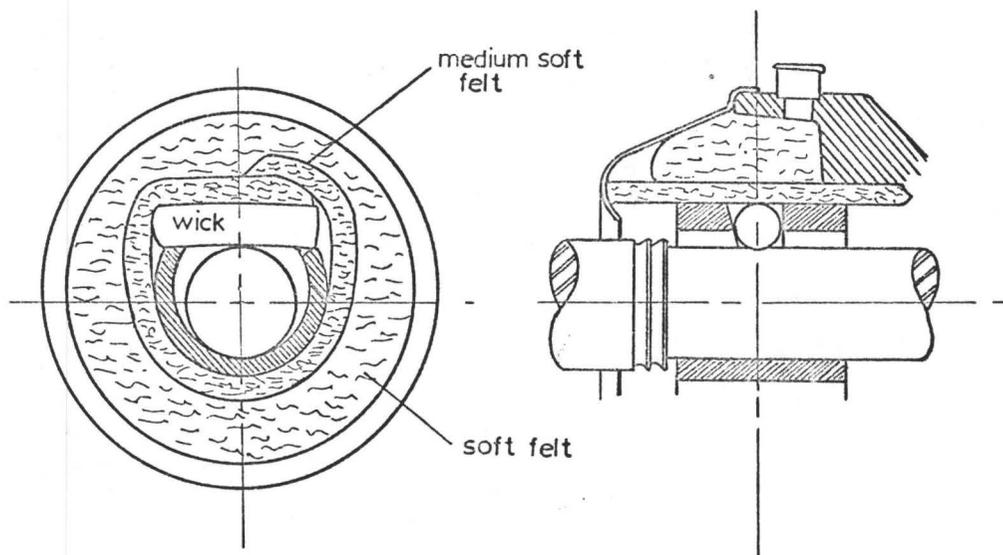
4 Sketch showing a wick_oiled bearing for good oil_storage and retention
